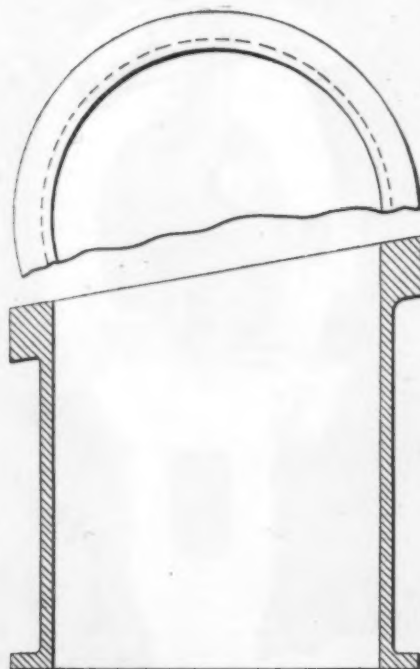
Pipe casting with 36-in. diameter offset flange.
